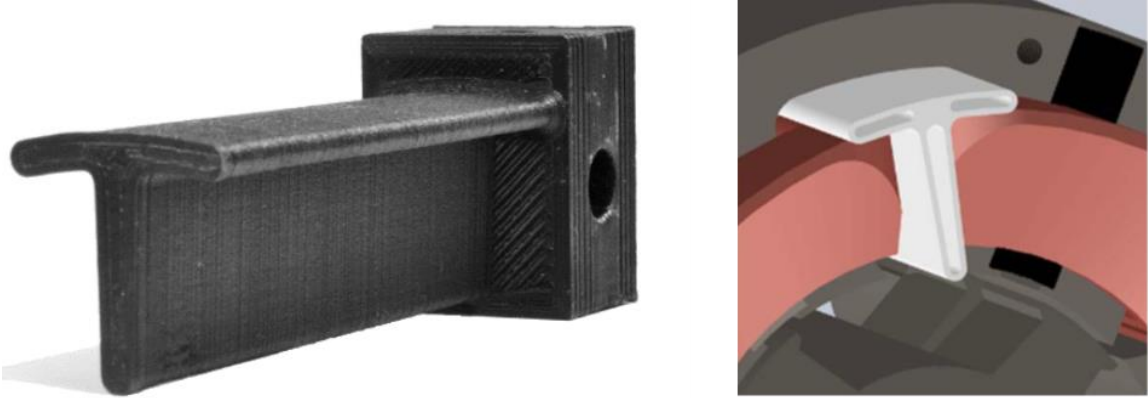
left) 3D-DWHX CF-Nylon prototype for heat transfer testing; right) 3D-DWHX shown in the stator slot of a motor equipped with permanent magnets [49]
